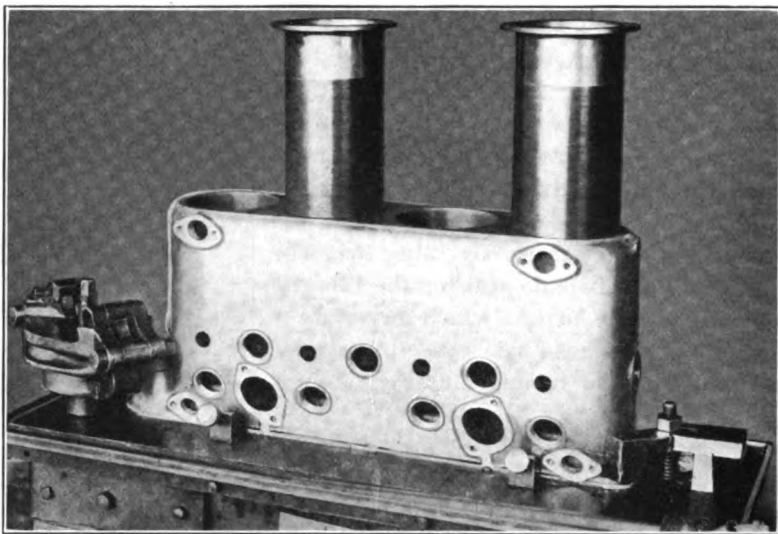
Section of sleeve and jacket assembly, models A, I and E.
